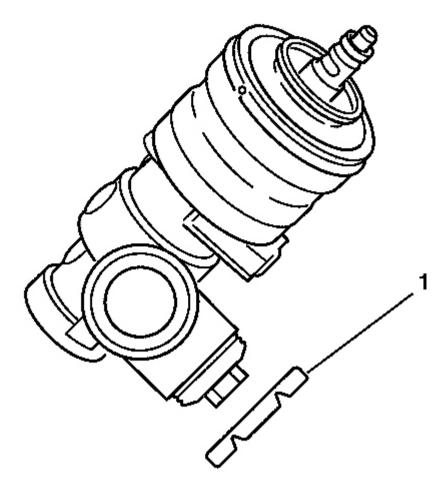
Adjuster Plug Lock Nut Courtesy of GENERAL MOTORS CORP.
